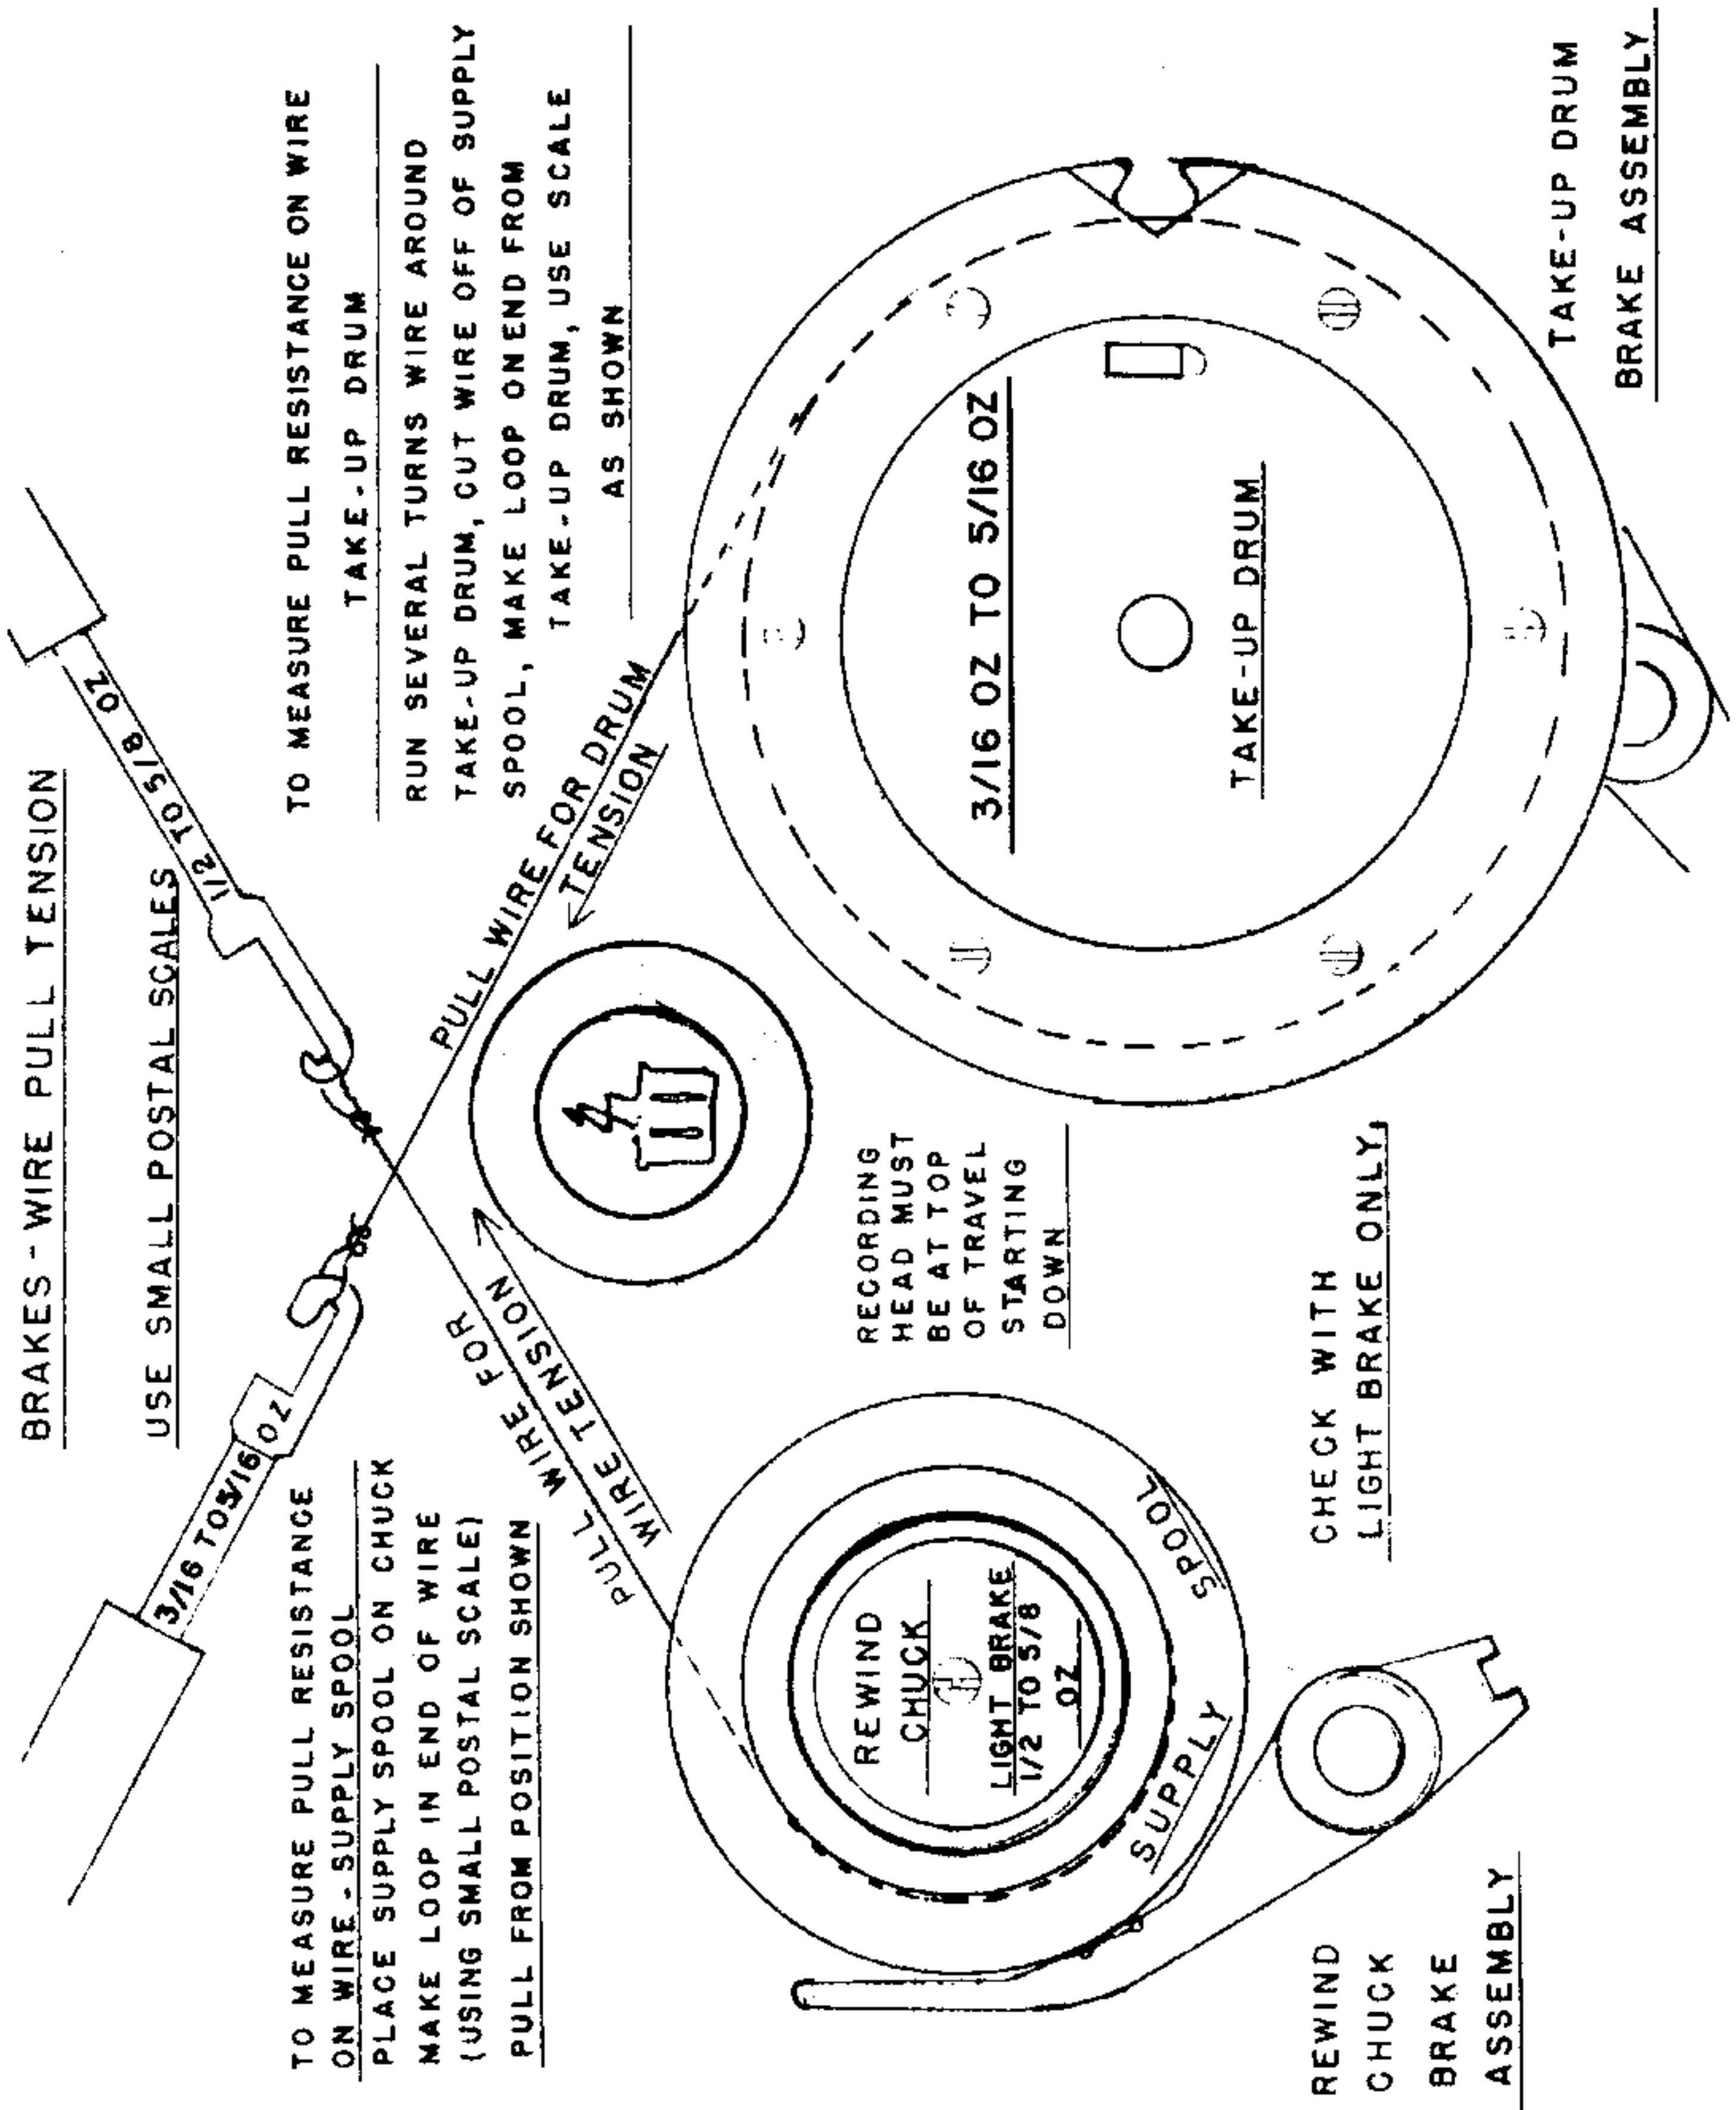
BRAKES -- WIRE PULL ADJUSTMENT
